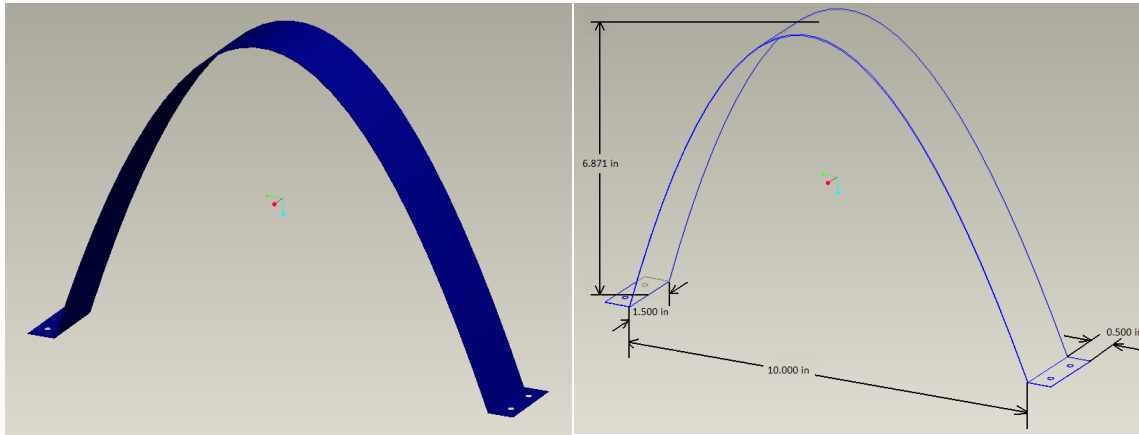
Pro-Engineering CAD model on Aluminum Strap 2 showing its dimensions
